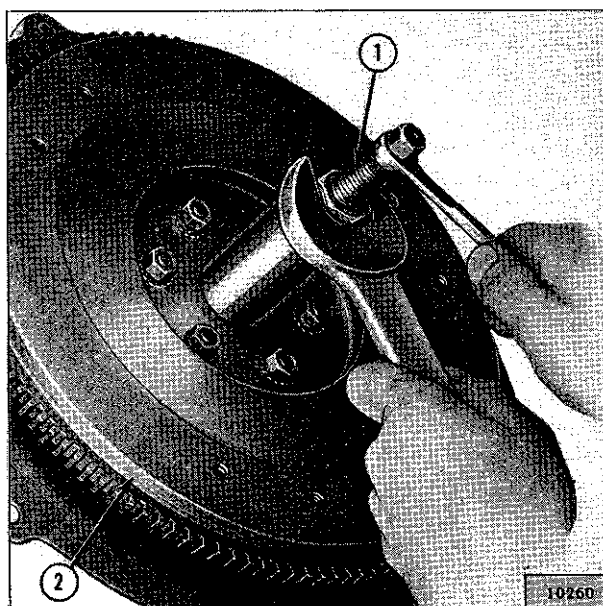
INSTALLING PILOT BUSHING TO FLYWHEEL
